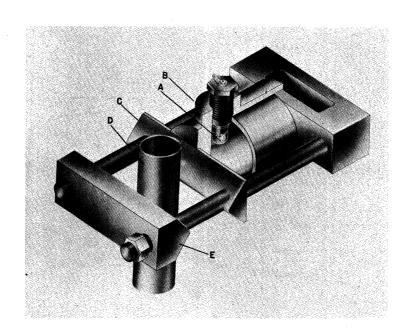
Schematic of Cold-Weld Sealer.
